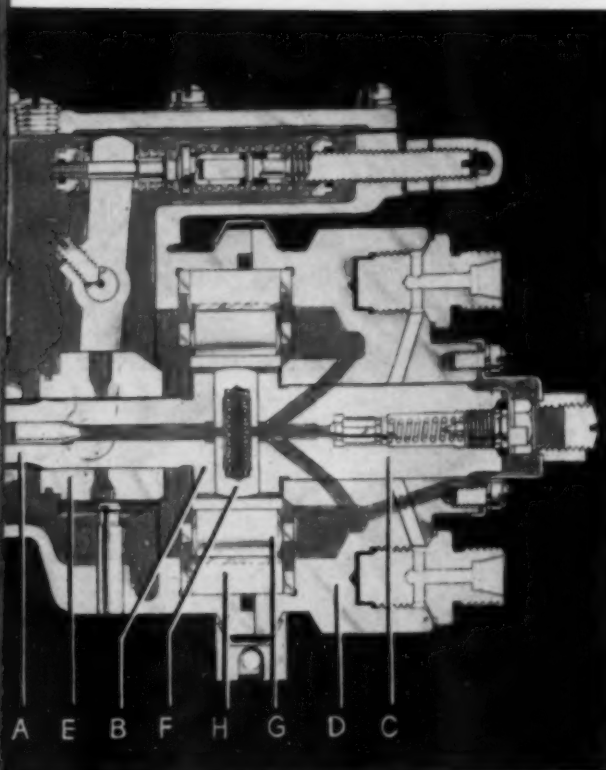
, above, shows new pump in cross-section with some parts deleted so metering process, described below can be followed.
